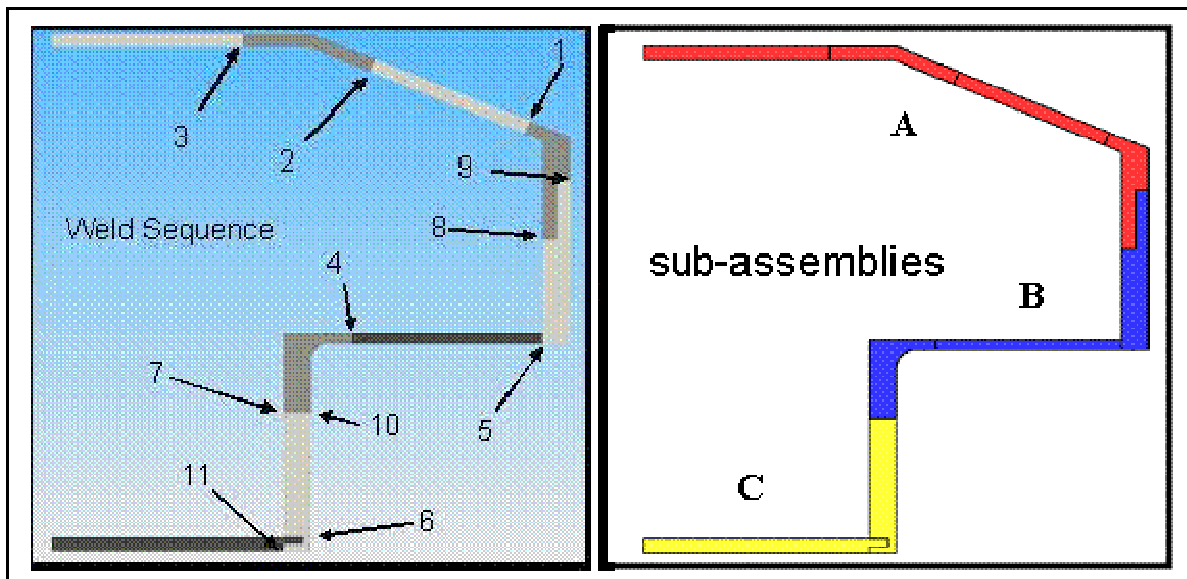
Demonstrator weld sequence and subassemblies
